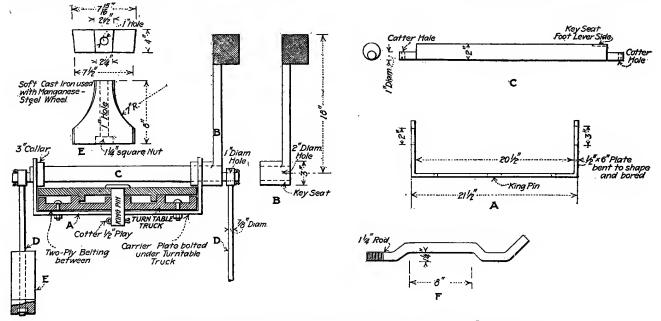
DETAILS OF SPECIALLY DESIGNED BRAKE FOR HECLA ORE CAR
